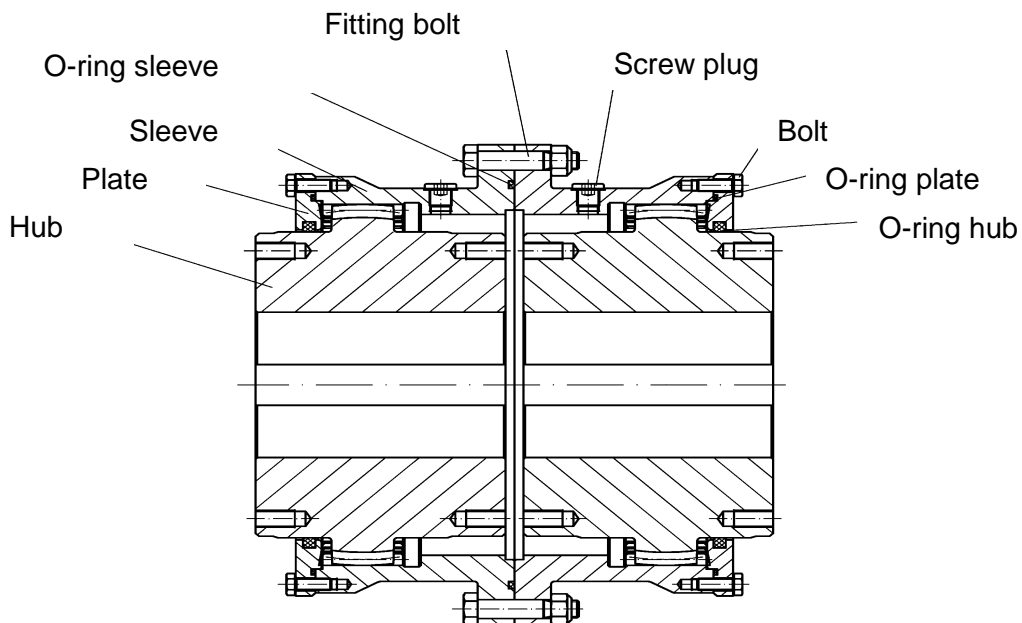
Assembly of a gear coupling series ZAKU-N, Type A
